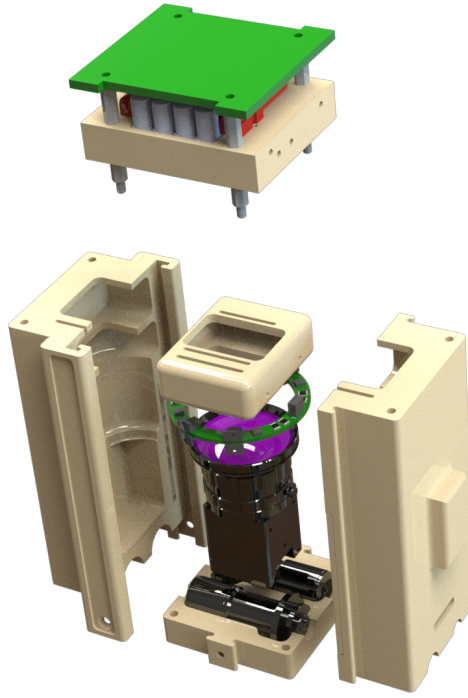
Render of the unibody inside the payload container (exploded view). The SU Board and the valve mounting interface can also be seen.
